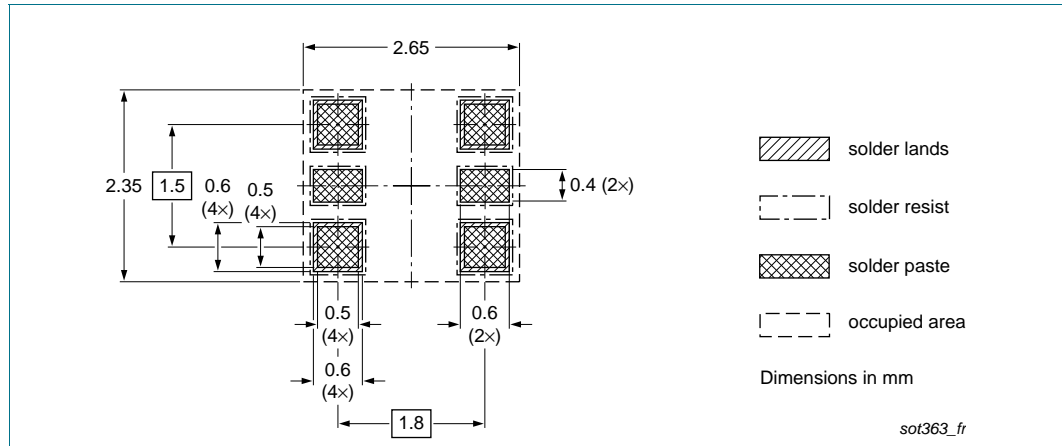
Reflow soldering footprint SOT363 (SC-88)
